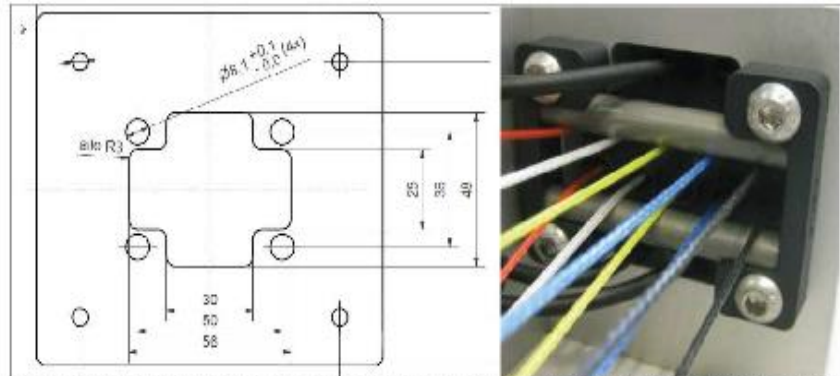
Dimensioned drawing for an optional mounting plate for the rotating joint, rotating joint view from below
